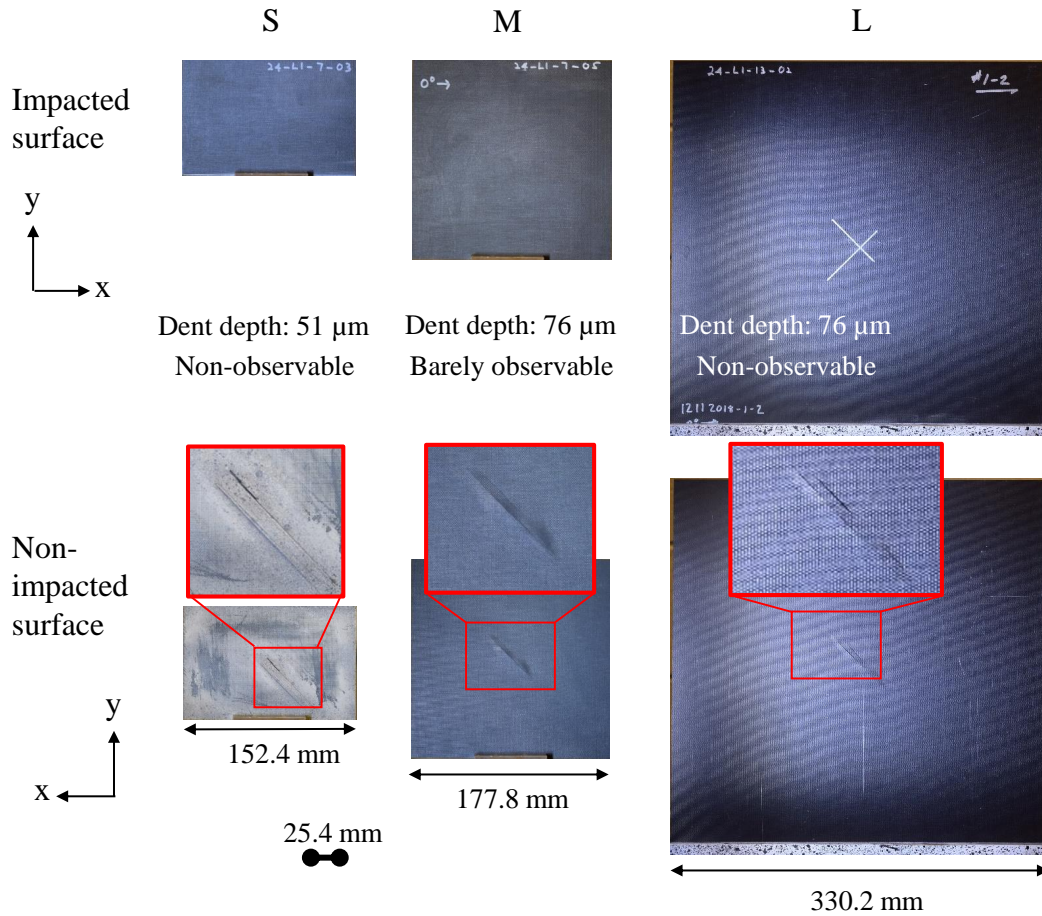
Inspections on the impacted L1-S/M/L-24 samples.
